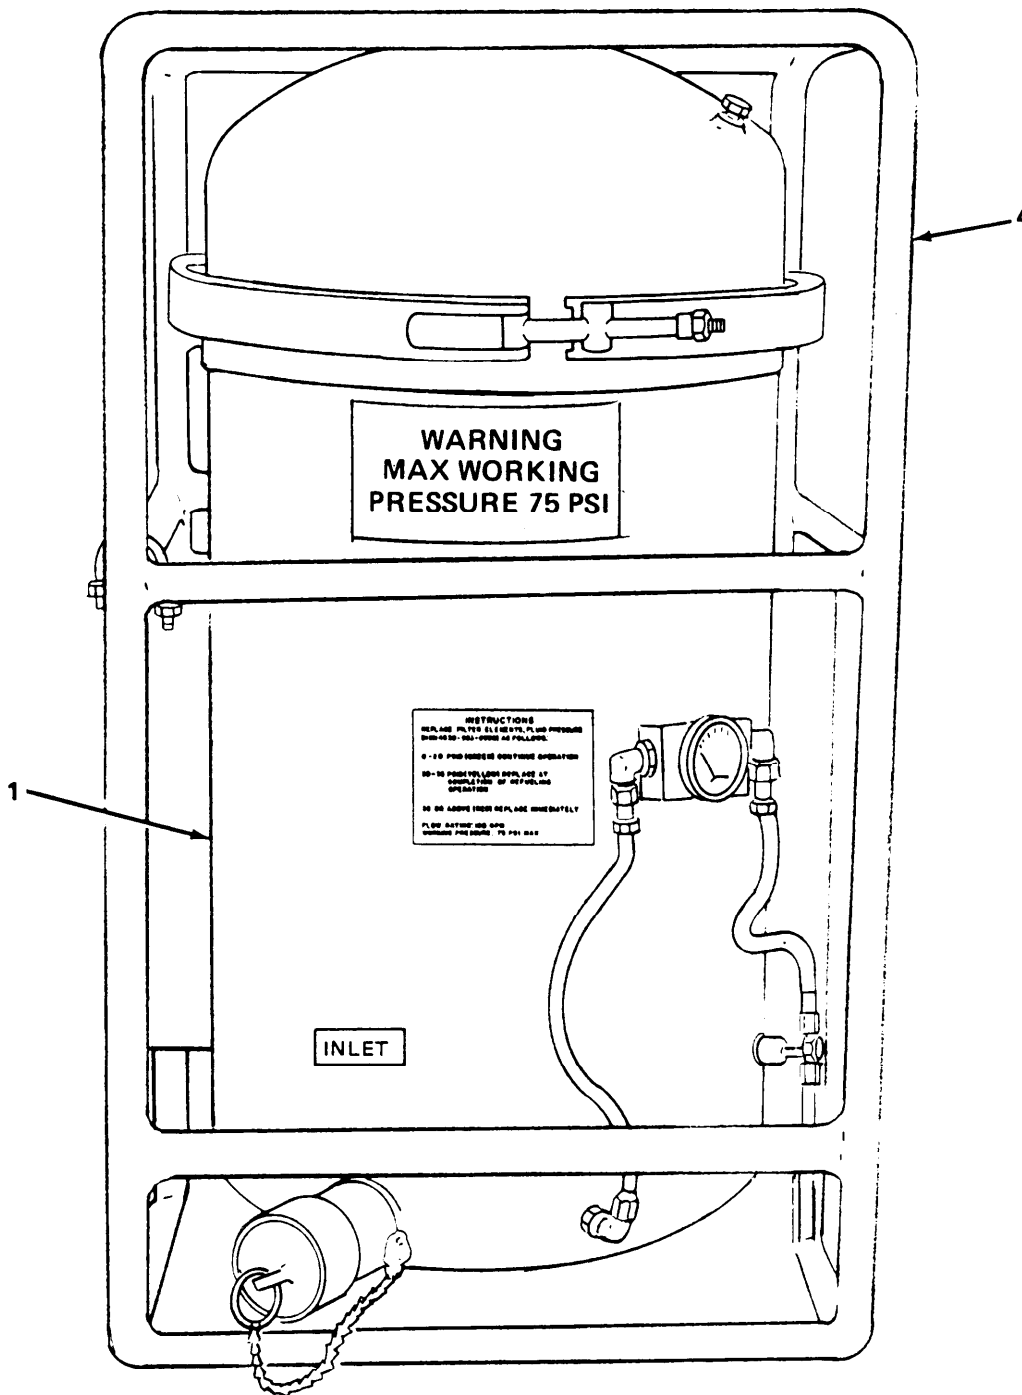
Filter/Separator Assembly (Sheet-1 of 2).
